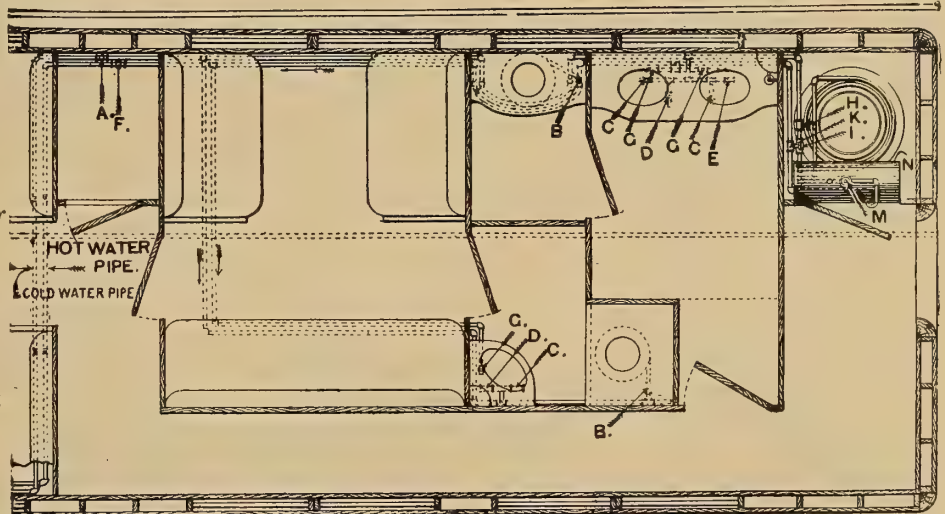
PART SECTIONAL PLAN, SHOWING PIPING AND CONNECTION BETWEEN AIR TANK, HEATER, STORAGE TANK AND LAVATORIES.
